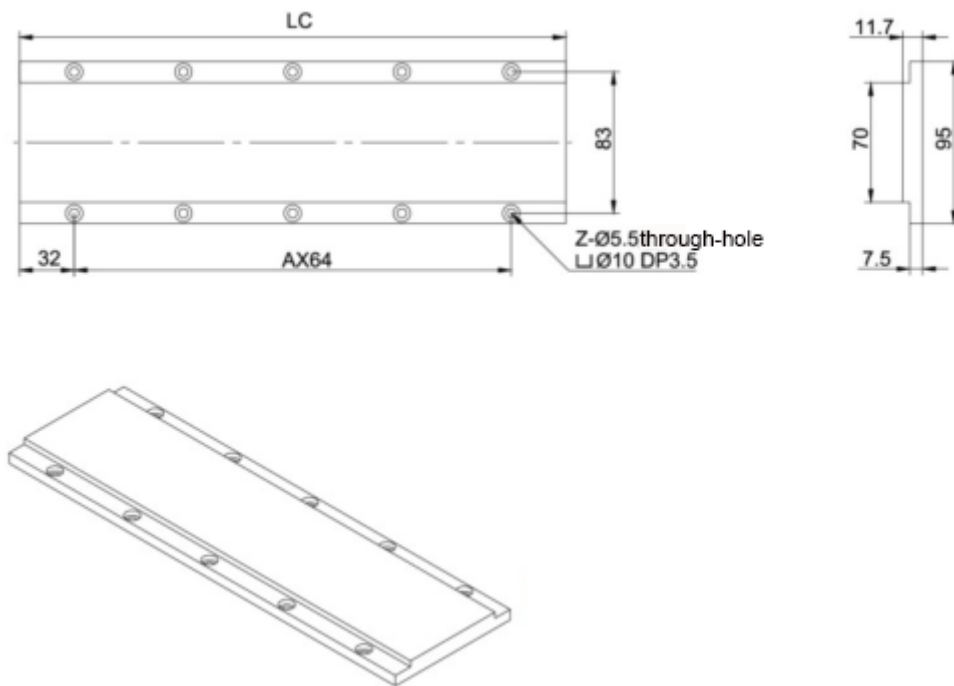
Dimensional drawing of WZCR-Z95 series stator
